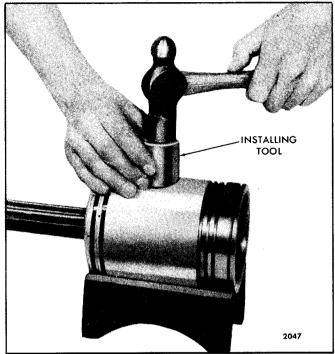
Installing Piston Pin Retainer using Holder J 1513-02
